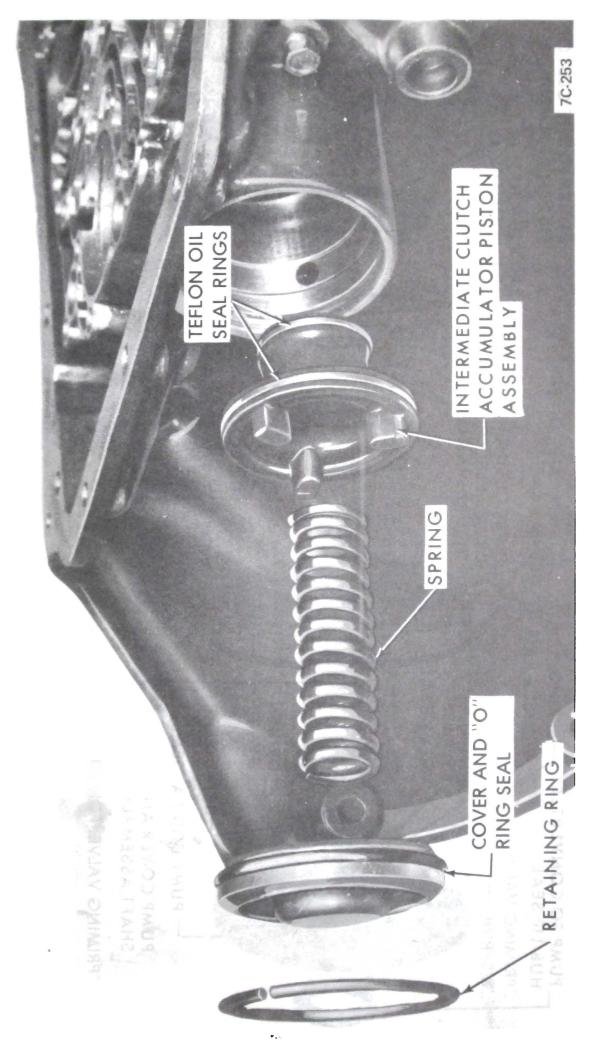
C-289 Intermediate Clutch Accumulator - Exploded View
